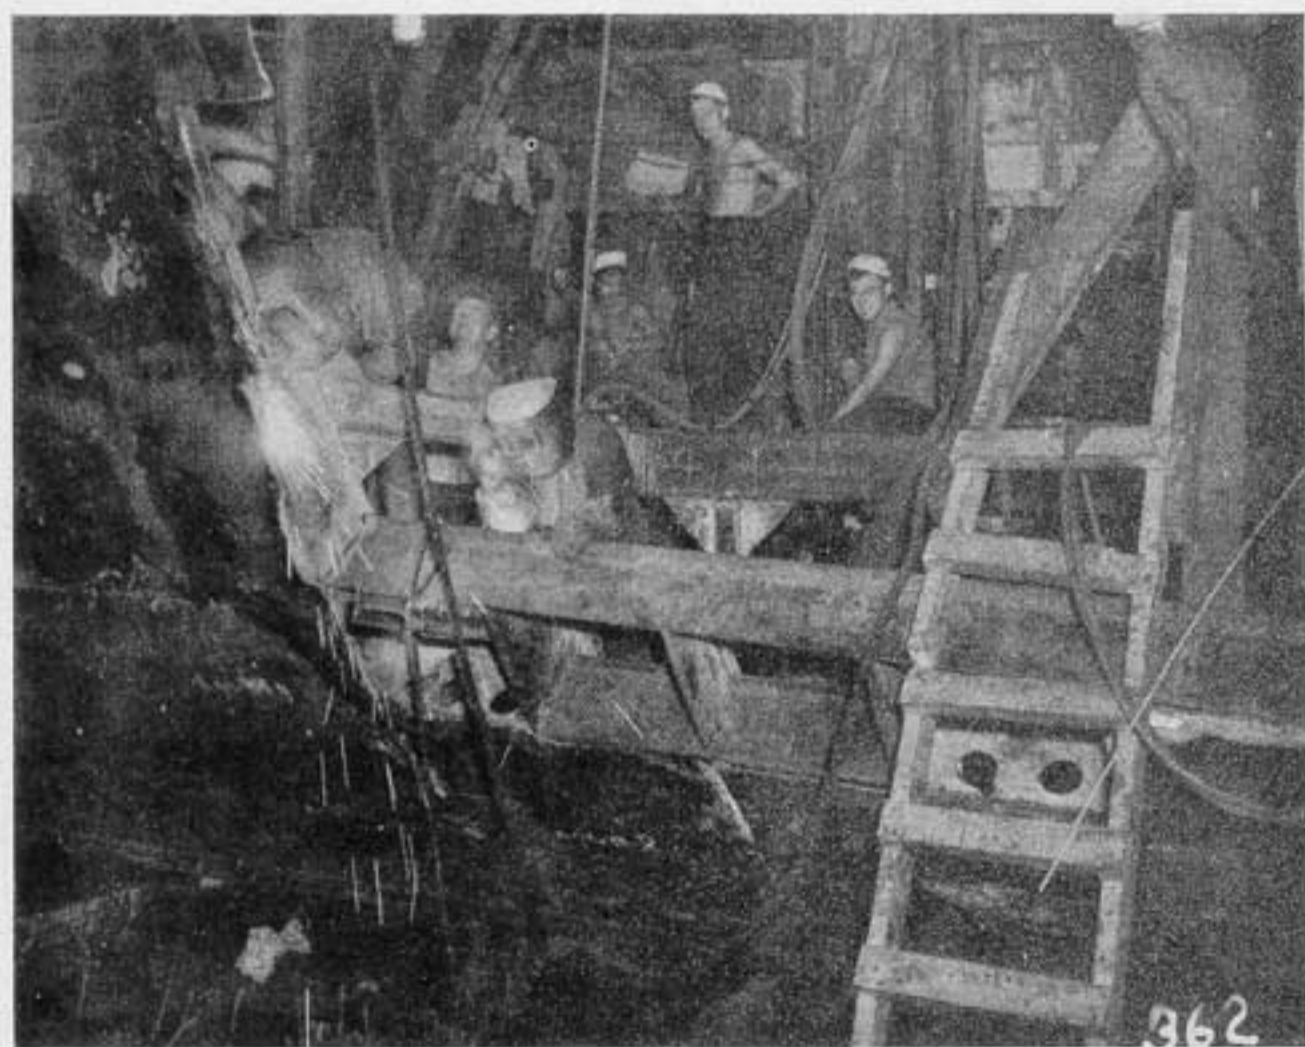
KILLEN (DD593). Longitudinals in way of damaged shell being restored by PIEDMONT (AD17) personnel.
